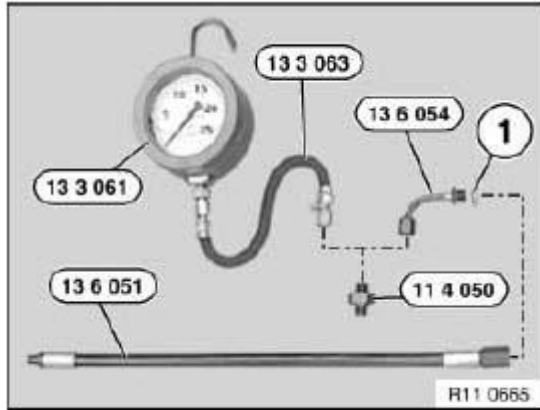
Identifying Special Tools (13 3 063), (13 6 054), (13 6 051), (11 4 050), (13 3 061) And Sealing Ring
